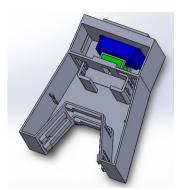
The low density MSCS setup showing location of the Mojo and cape PCB (blue) [6]
